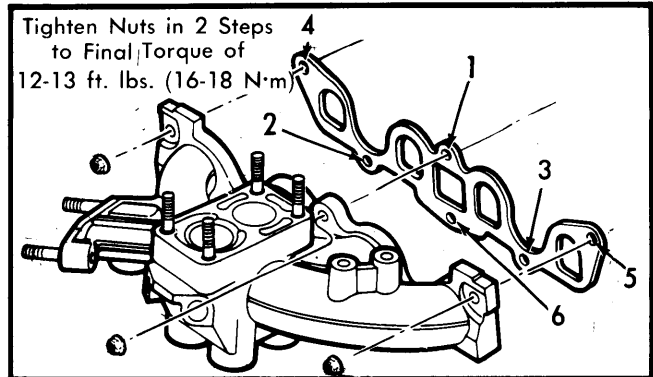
1.6L Engine Intake Manifold Tightening Sequence
